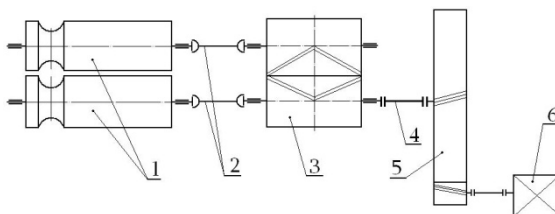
Scheme of the plug-mill main line: 1) rollers; 2) spindles; 3) pinion stand; 4) interval shaft; 5) reducer; 6) electric motor
